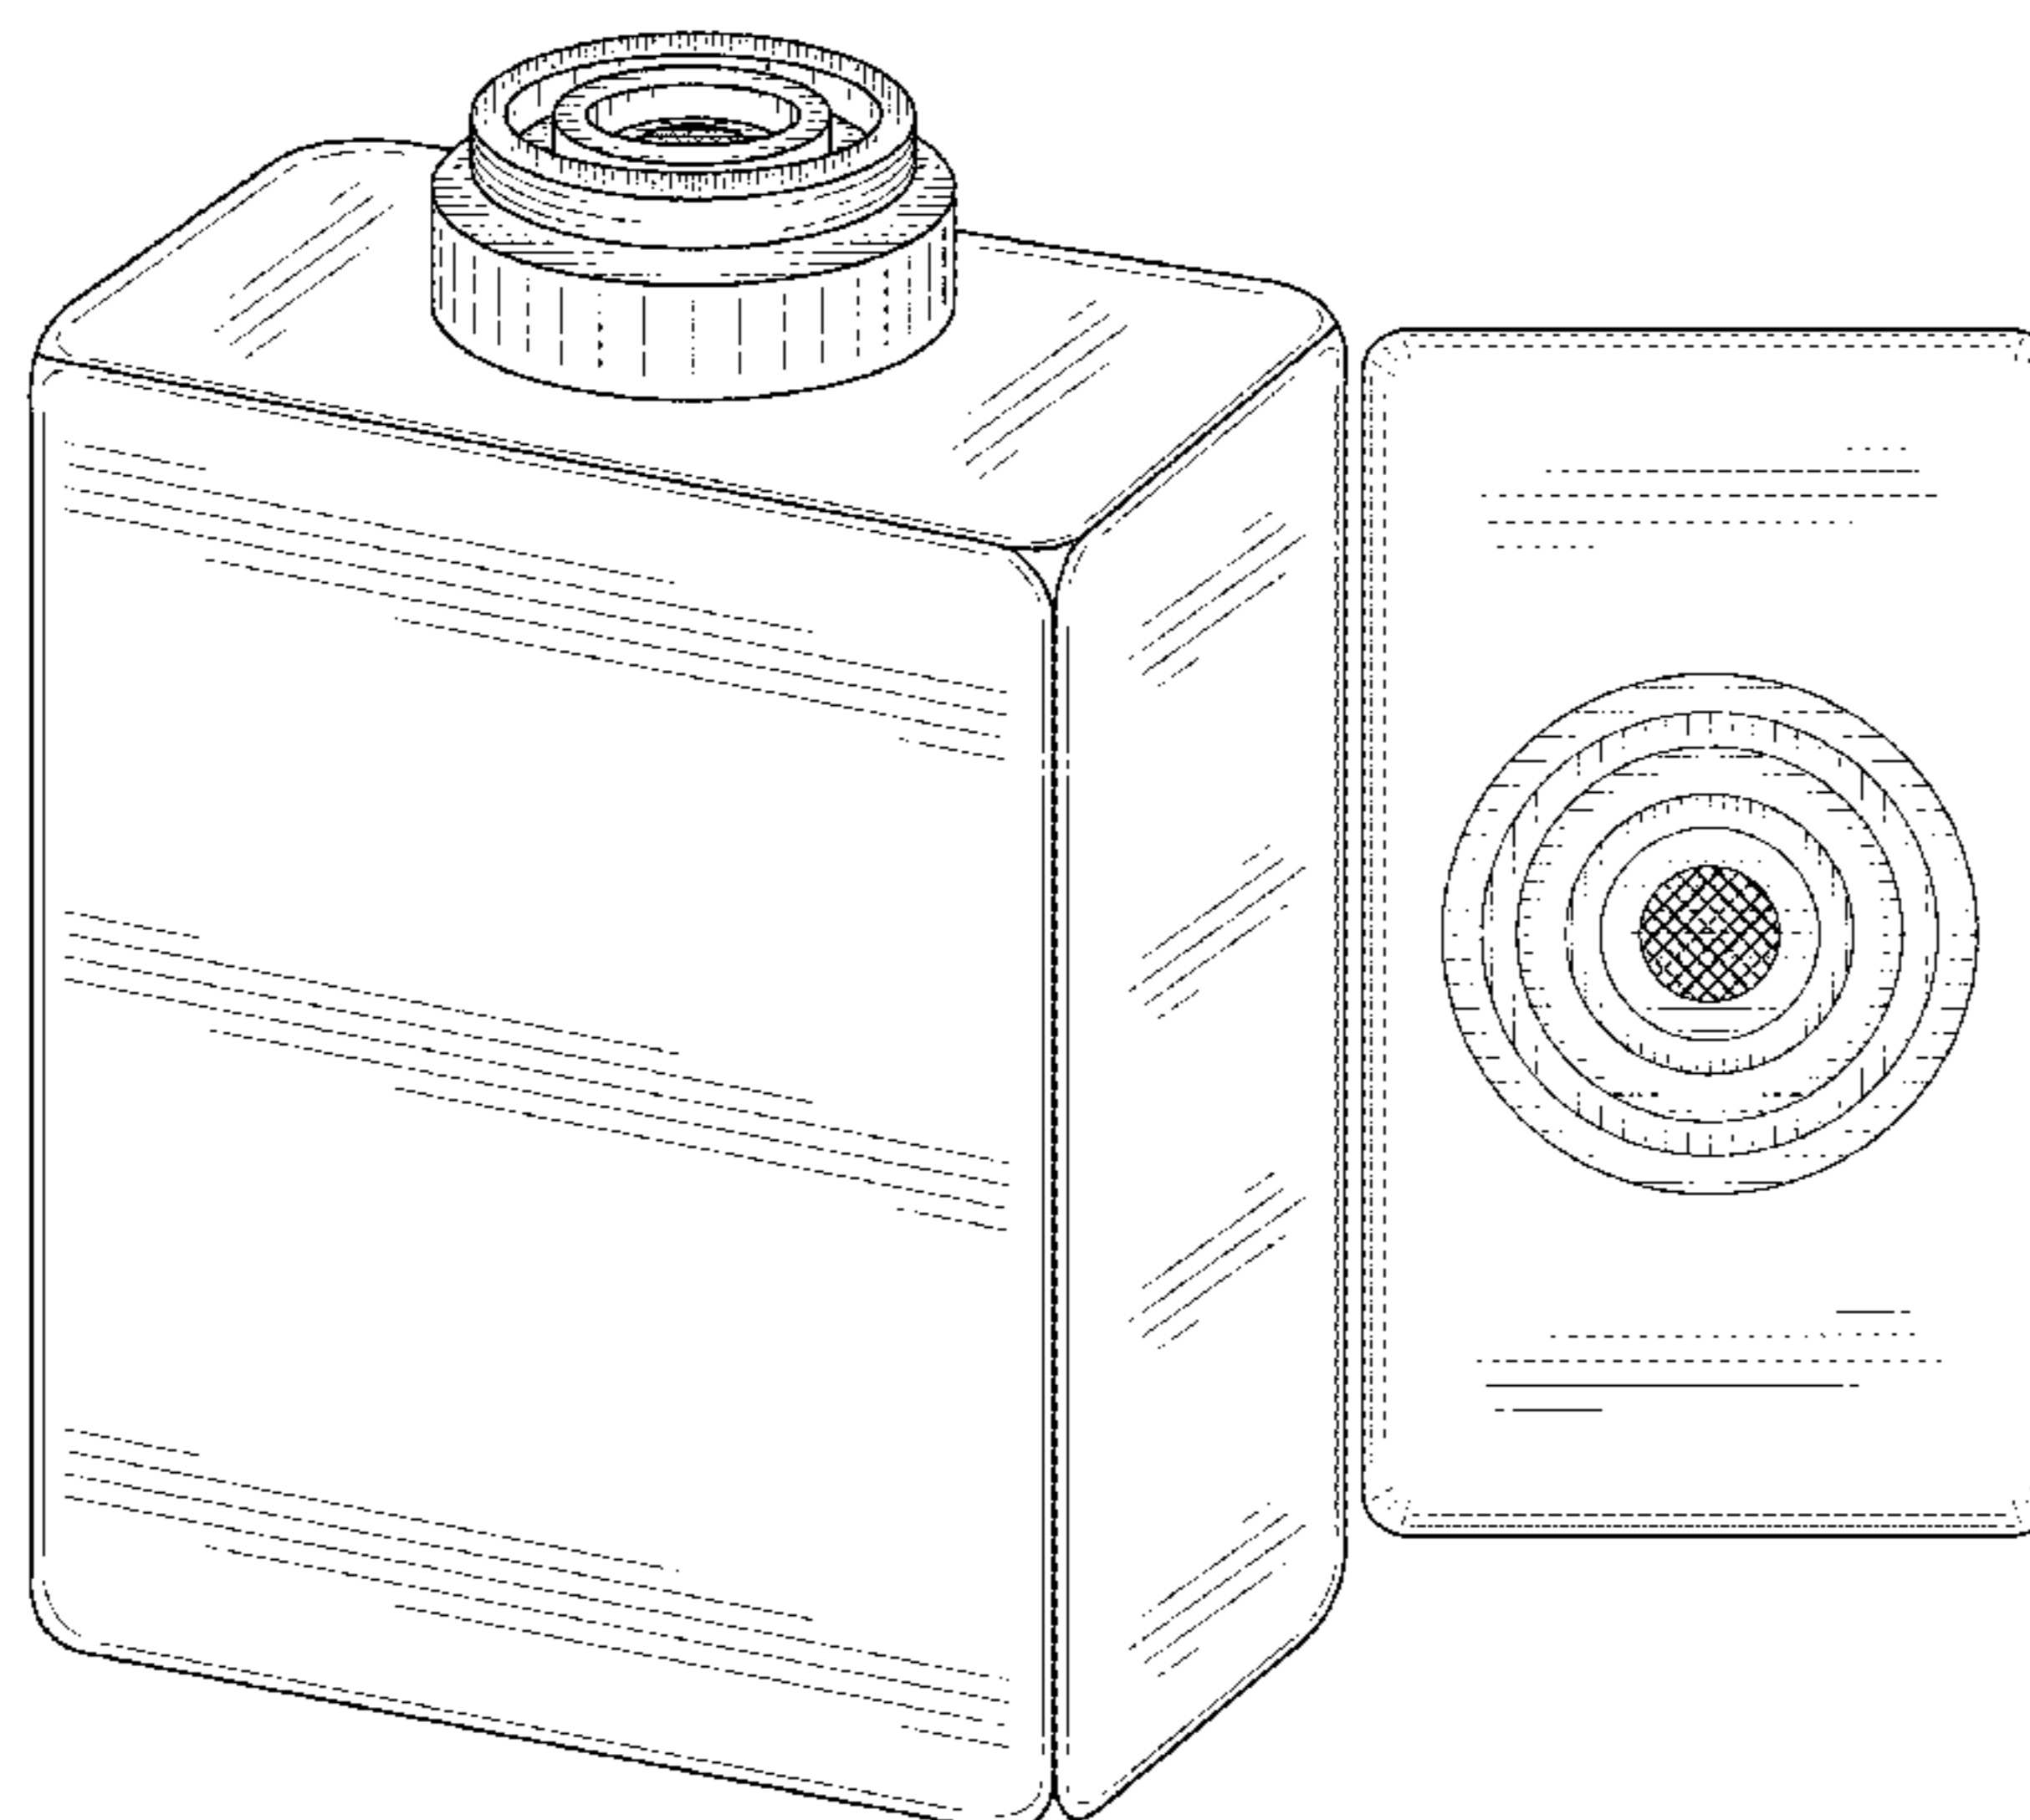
is a top perspective view of a bottle with cap; FIG. 2 is a bottom perspective view of the bottle with cap; FIG. 3 is a top view of the bottle with cap; FIG. 4 is a bottom view of the bottle with cap; FIG. 5 is a front view of a bottle with cap; and, FIG. 6 is a right side view of a bottle with cap. The undisclosed rear view is symmetrical to the front view and the undisclosed left view is symmetrical to the right side view.
